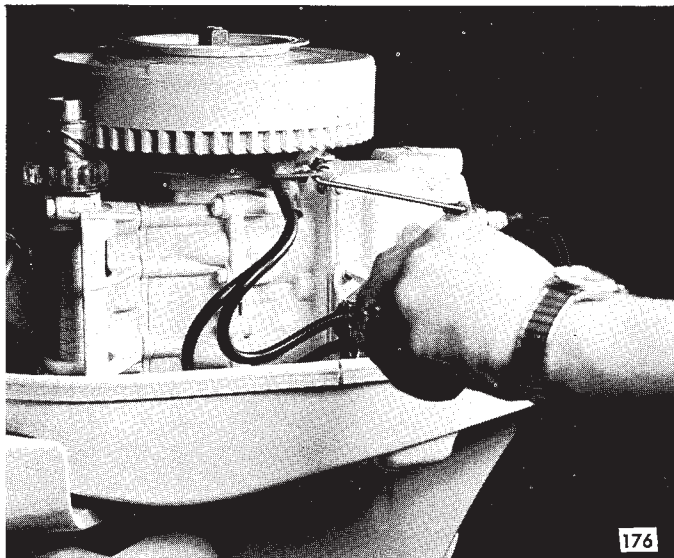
REMOVING MAGNETO CONTROL LEVER
